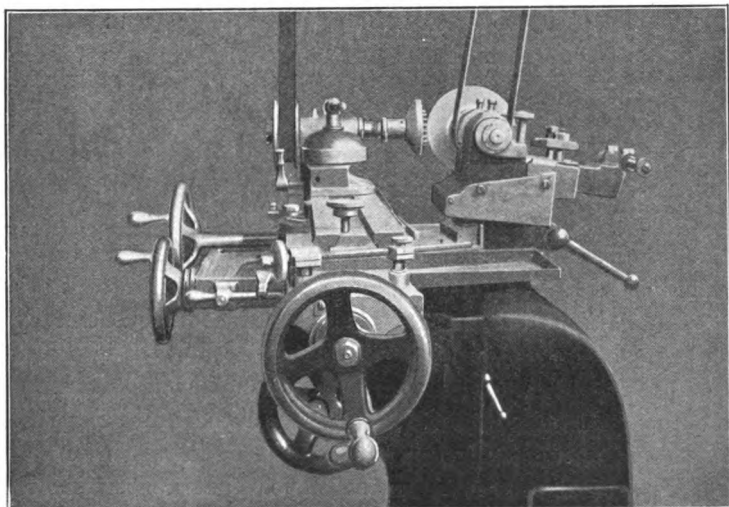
"Guest" Cutter Grinder. Hollow-grinding a Slitting Saw.
